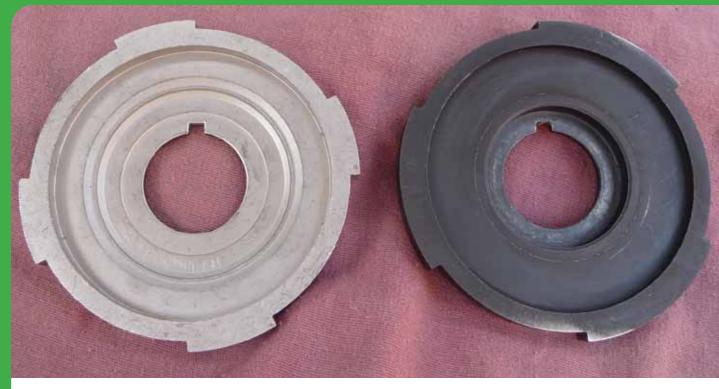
Both trigger wheels are configured to fit on the same crankshaft with no problem. The correct one had four triggers per revolution, instead of three.
